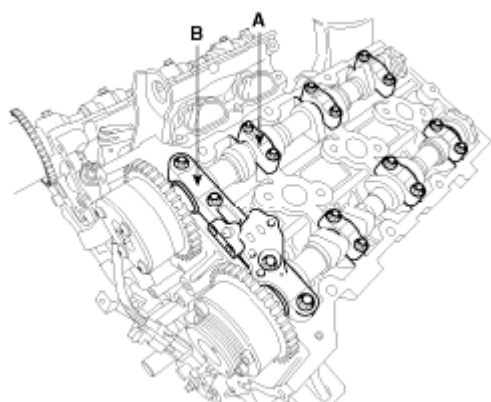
Identifying LH Camshaft Bearing Cap & Thrust Bearing Cap
